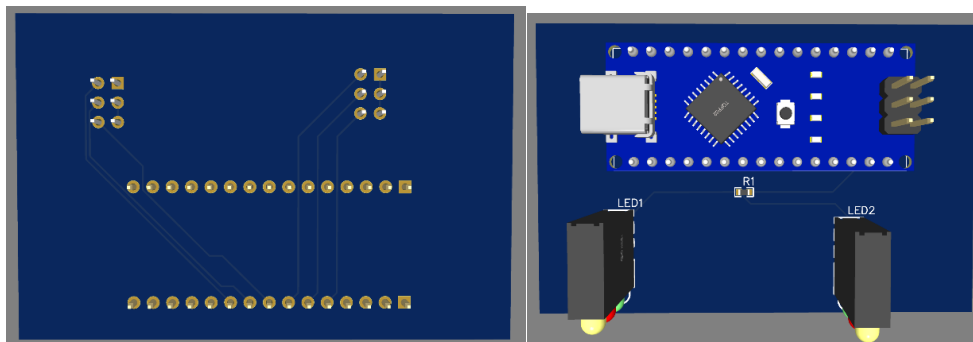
3D Top/Bottom View of PCB (Arduino Based)
